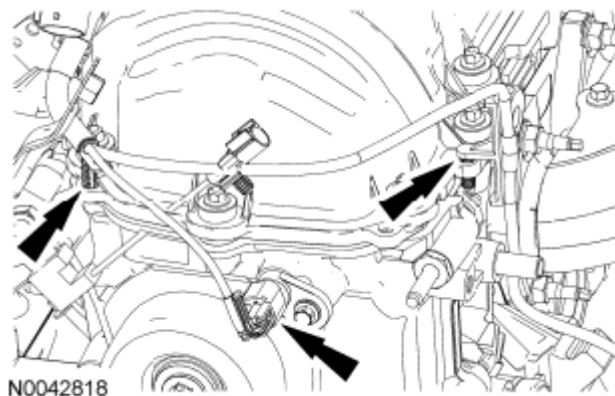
Locating CMP Sensor Electrical Connector And Wiring Harness Retainers (LH)
